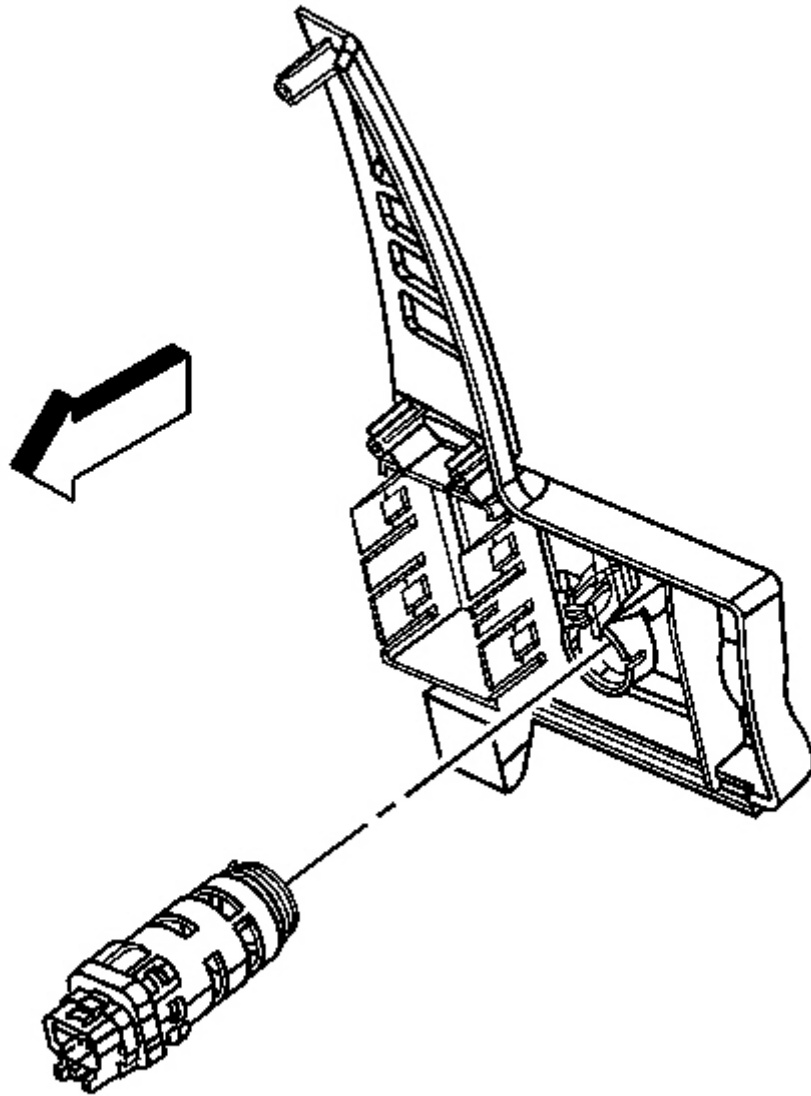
View Of Inside Air Temperature Sensor Electrical Connector
